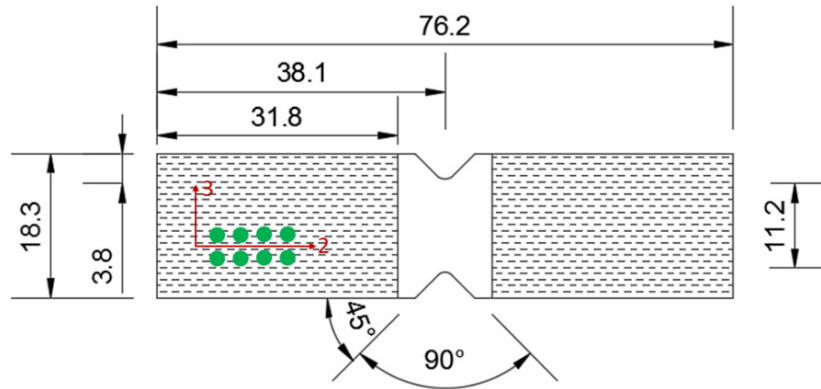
Typical v-notch shear specimen geometry (all dimensions in mm).
